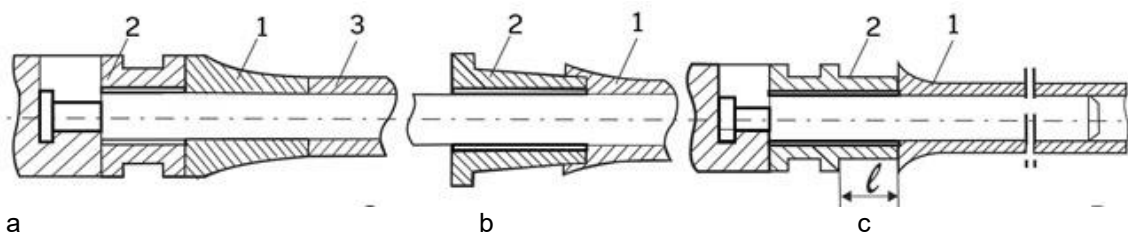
Methods (a, b and c) of more complete rolling Pilger heads: 1 – pilgrim head, 2 – mandrel ring, 3 – alloy steel pipe
